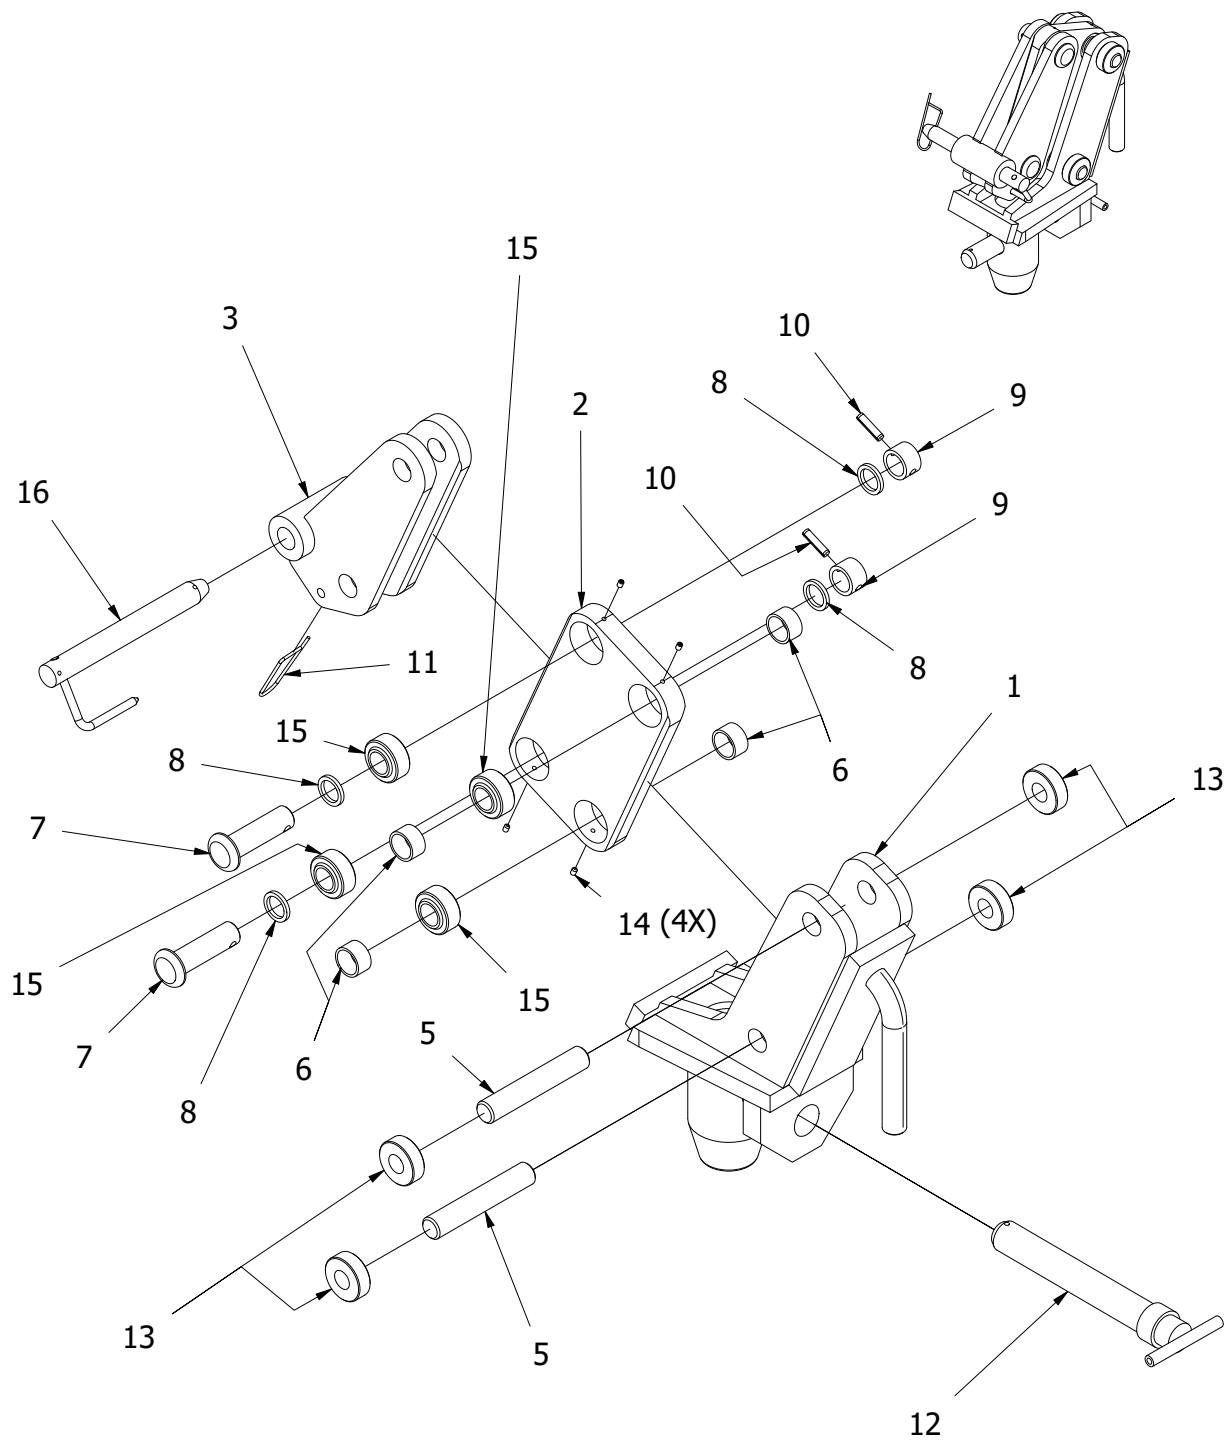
AM-1928-A34 Forward Mount Assembly, LH
